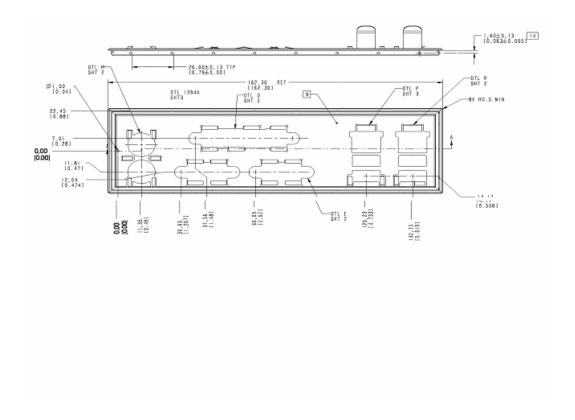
Intel Server Board S875WP1-E I/O Shield Drawing
